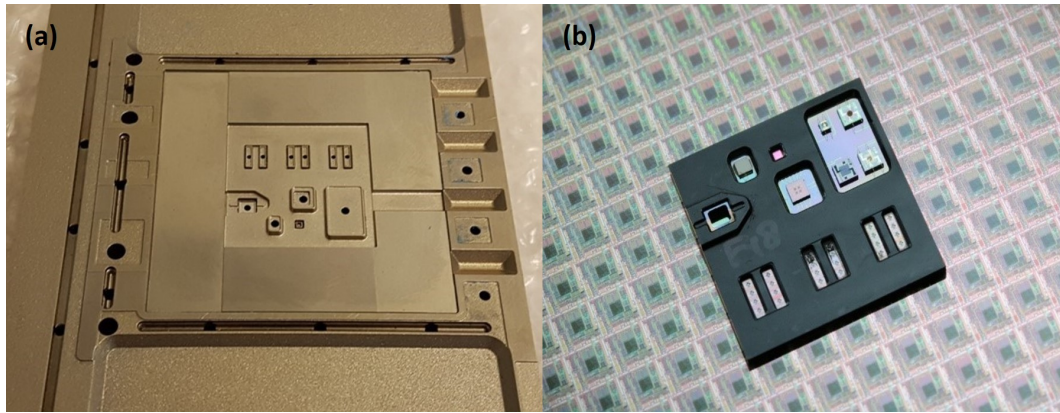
(a) Overmold tool fabricated for the application on the MSP demonstrator. (b) Overmolded MSP demonstrator chip prior to assembly on evaluation PCB.
